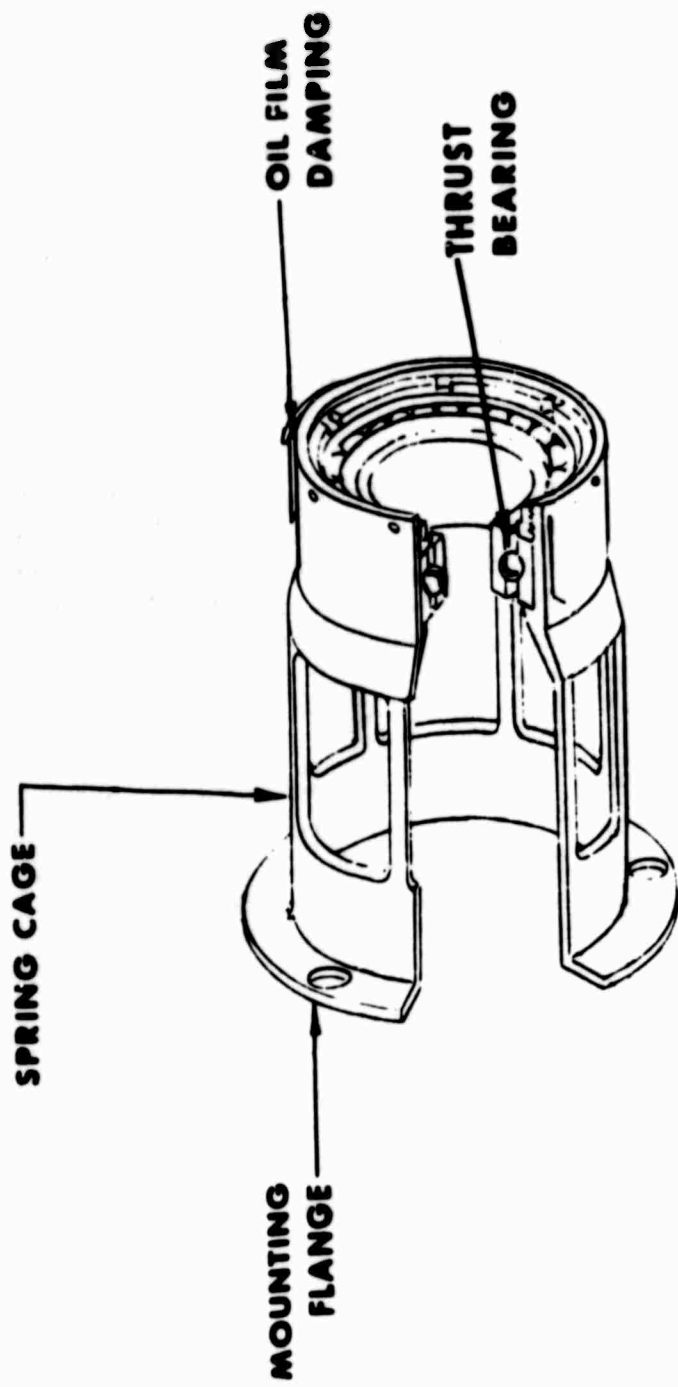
Typical Continental Gas Turbine Engine Flexible Main Bearing Support.
